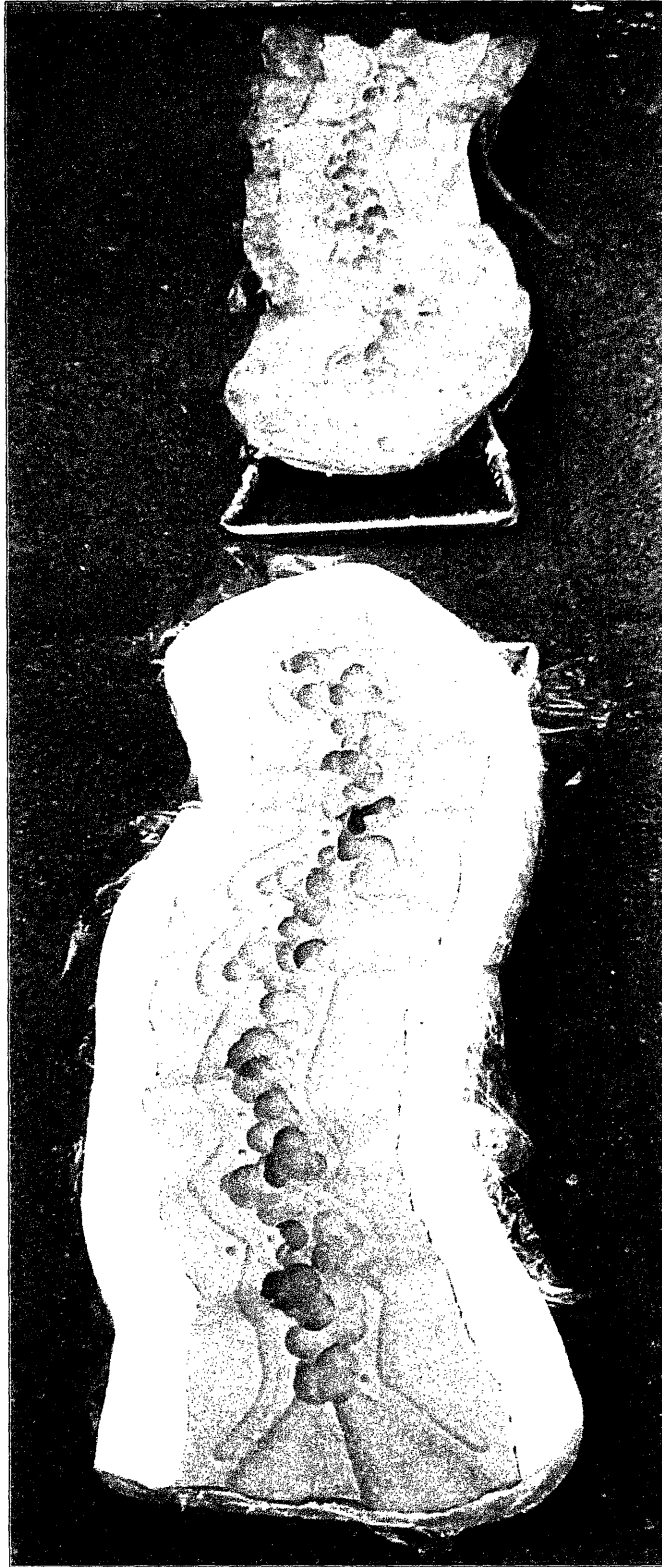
Open Final Mold. Here the two halves of the final mold are opened and laid out in position for the initial casting stage to begin. Section 5.2.2 discusses the method used to cast using this mold.
